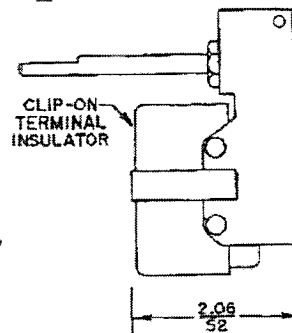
(right) — Clip-on terminal insulator, optional at extra cost on models specifying adjustments shown in Figs. 3, 4 and 5, but without center support mounting (Fig. 7).
